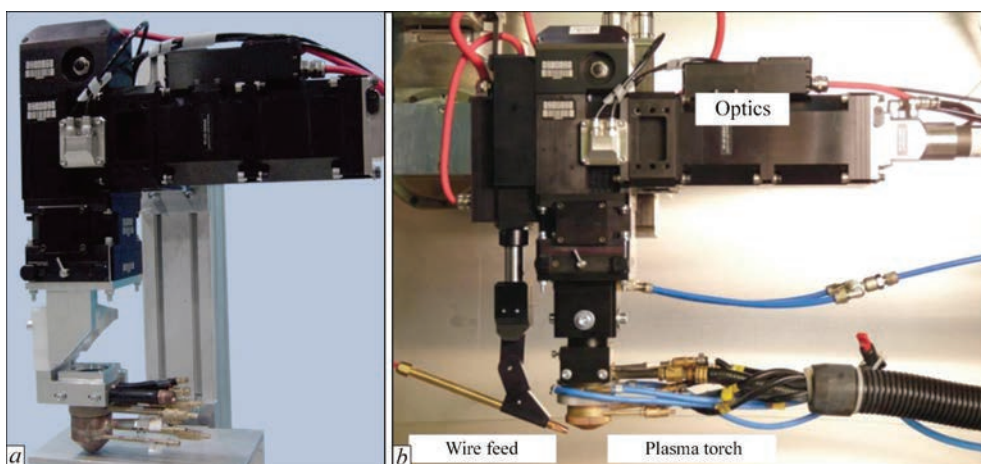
Integrated head for laser-plasma welding: without (*a*) [44] and with (*b*) [45] filler wire feed
